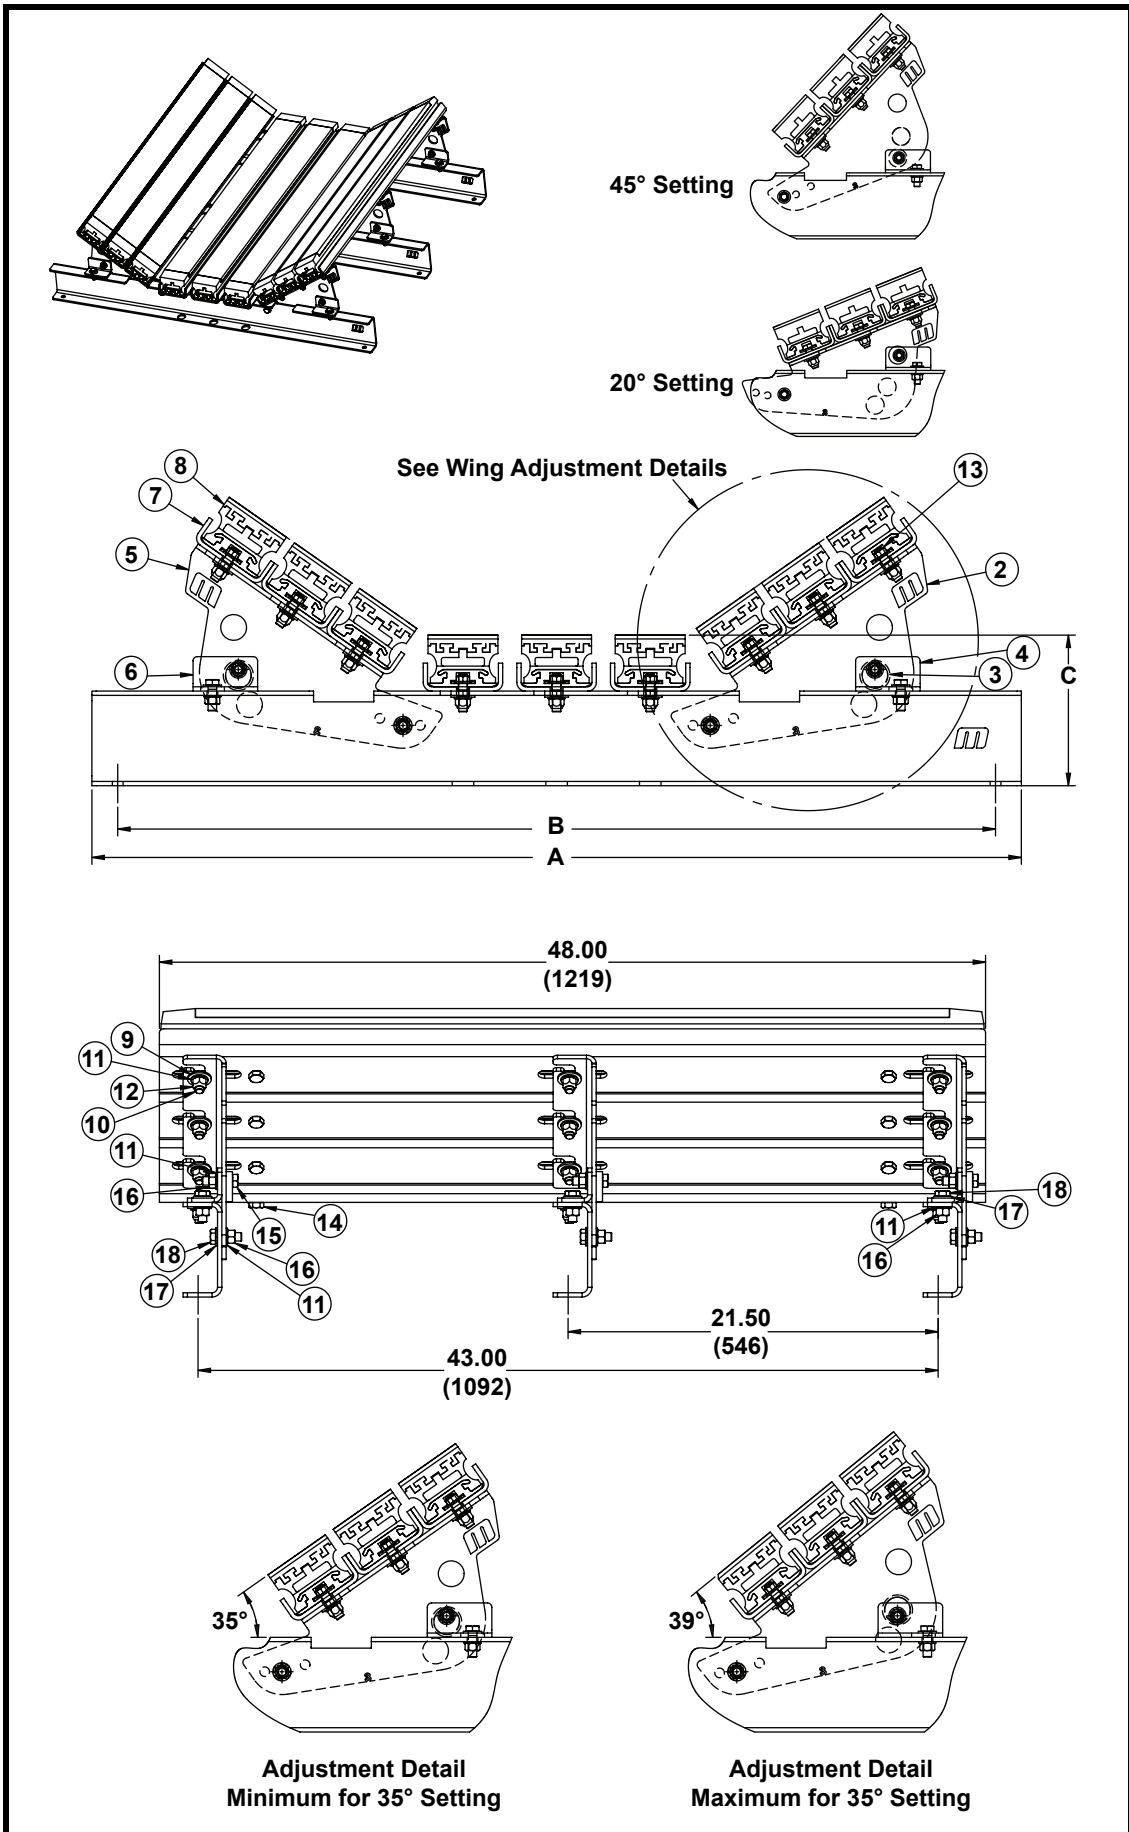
Martin® Impact Cradle LD Assembly, P/N 36010-XXX (Sheet 1 of 2)
